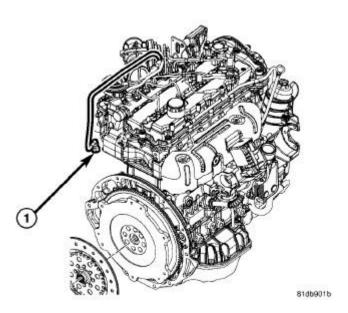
Fuel Pump Return Line Courtesy of CHRYSLER LLC
